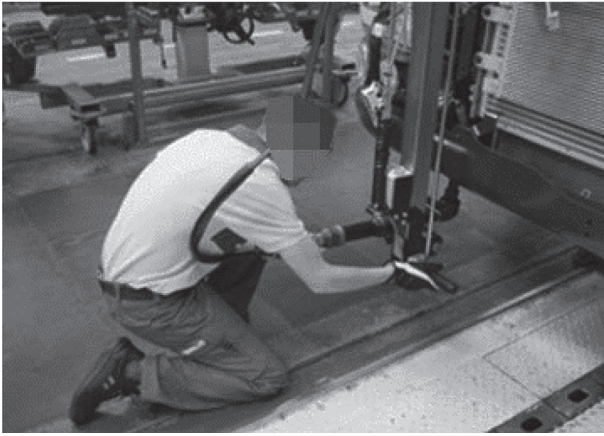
Tightening screws at 'Mounting bumper on chassis' workstation caused awkward trunk and neck postures.
